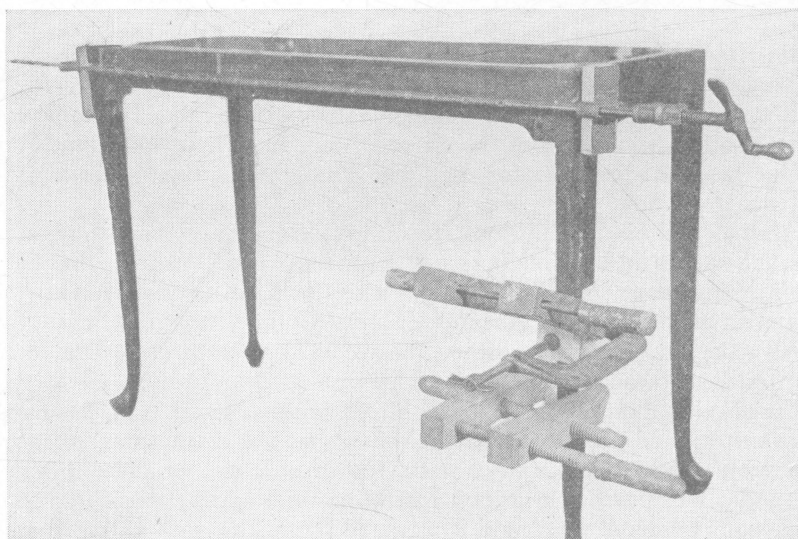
Two front legs clamped together by a steel bar clamp. The cracked right front leg which has been glued, is clamped with two screws and an iron C-clamp. Note use of soft pine blocks between all clamp jaws and furniture to prevent marring the latter.
